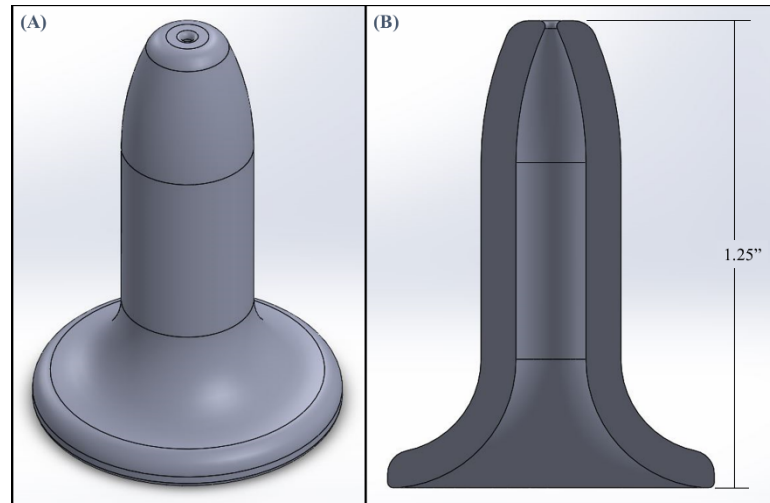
Third version of the Bullet Design that was produced. (A) isometric view, (B) section view
